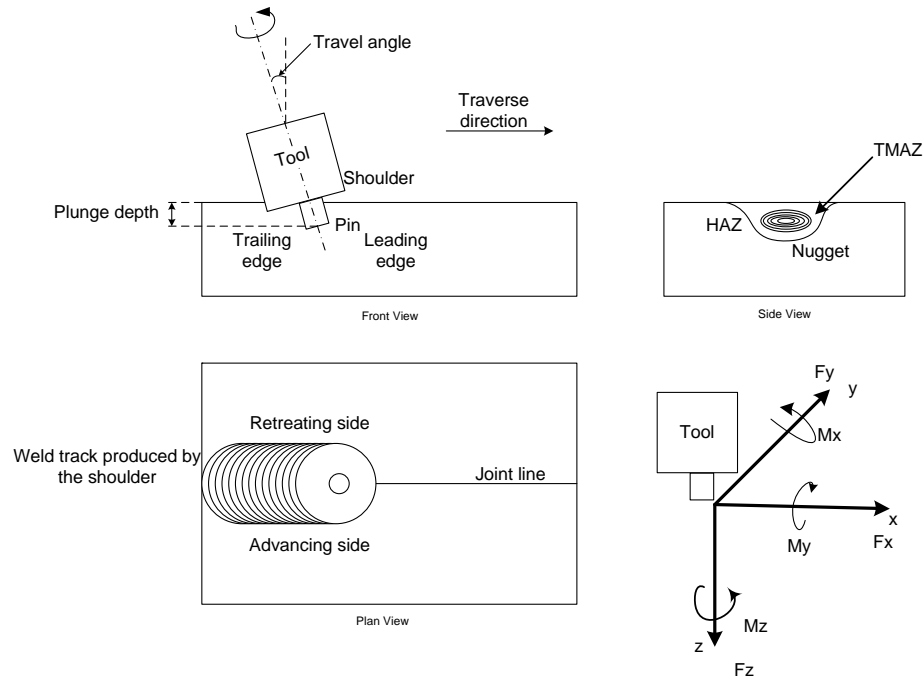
Schematic Representation of Friction Stir Welding.
